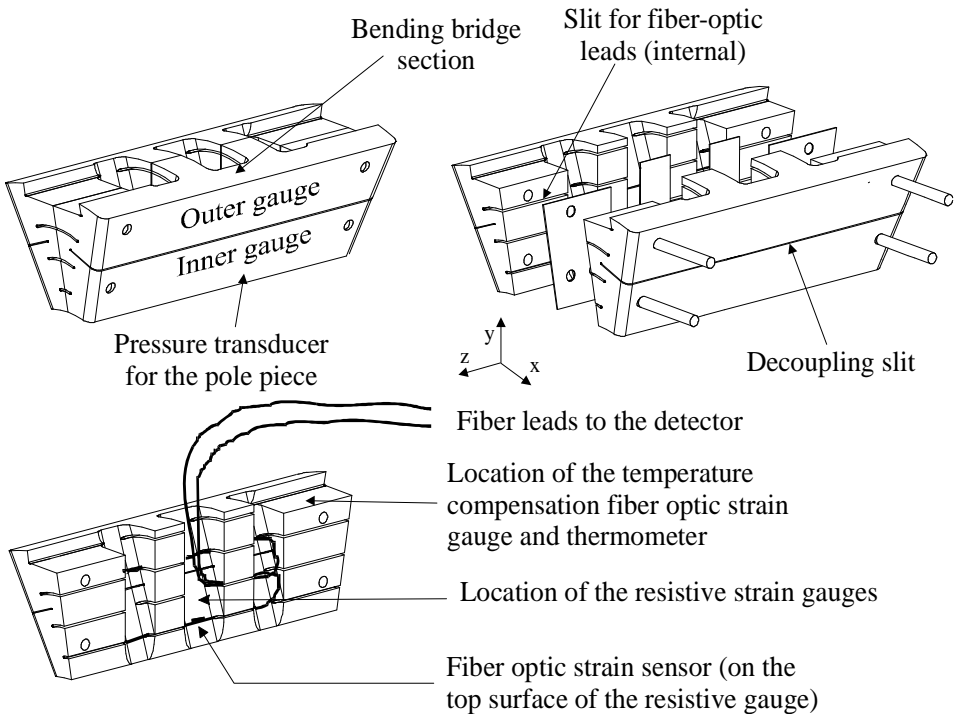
The combined optical and electrical strain gauge stress transducer. The top left picture shows the assembled unit, top right shows the exploded view of the components. On bottom left the mounting locations of the resistive and fiber-optic sensors are illustrated.
